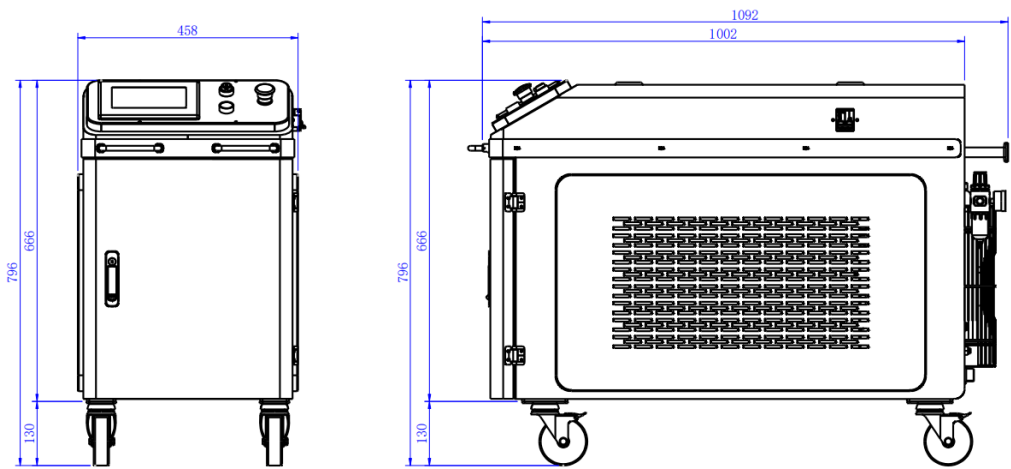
Dimensional diagram of GY-FLC500MW laser cleaning machine
